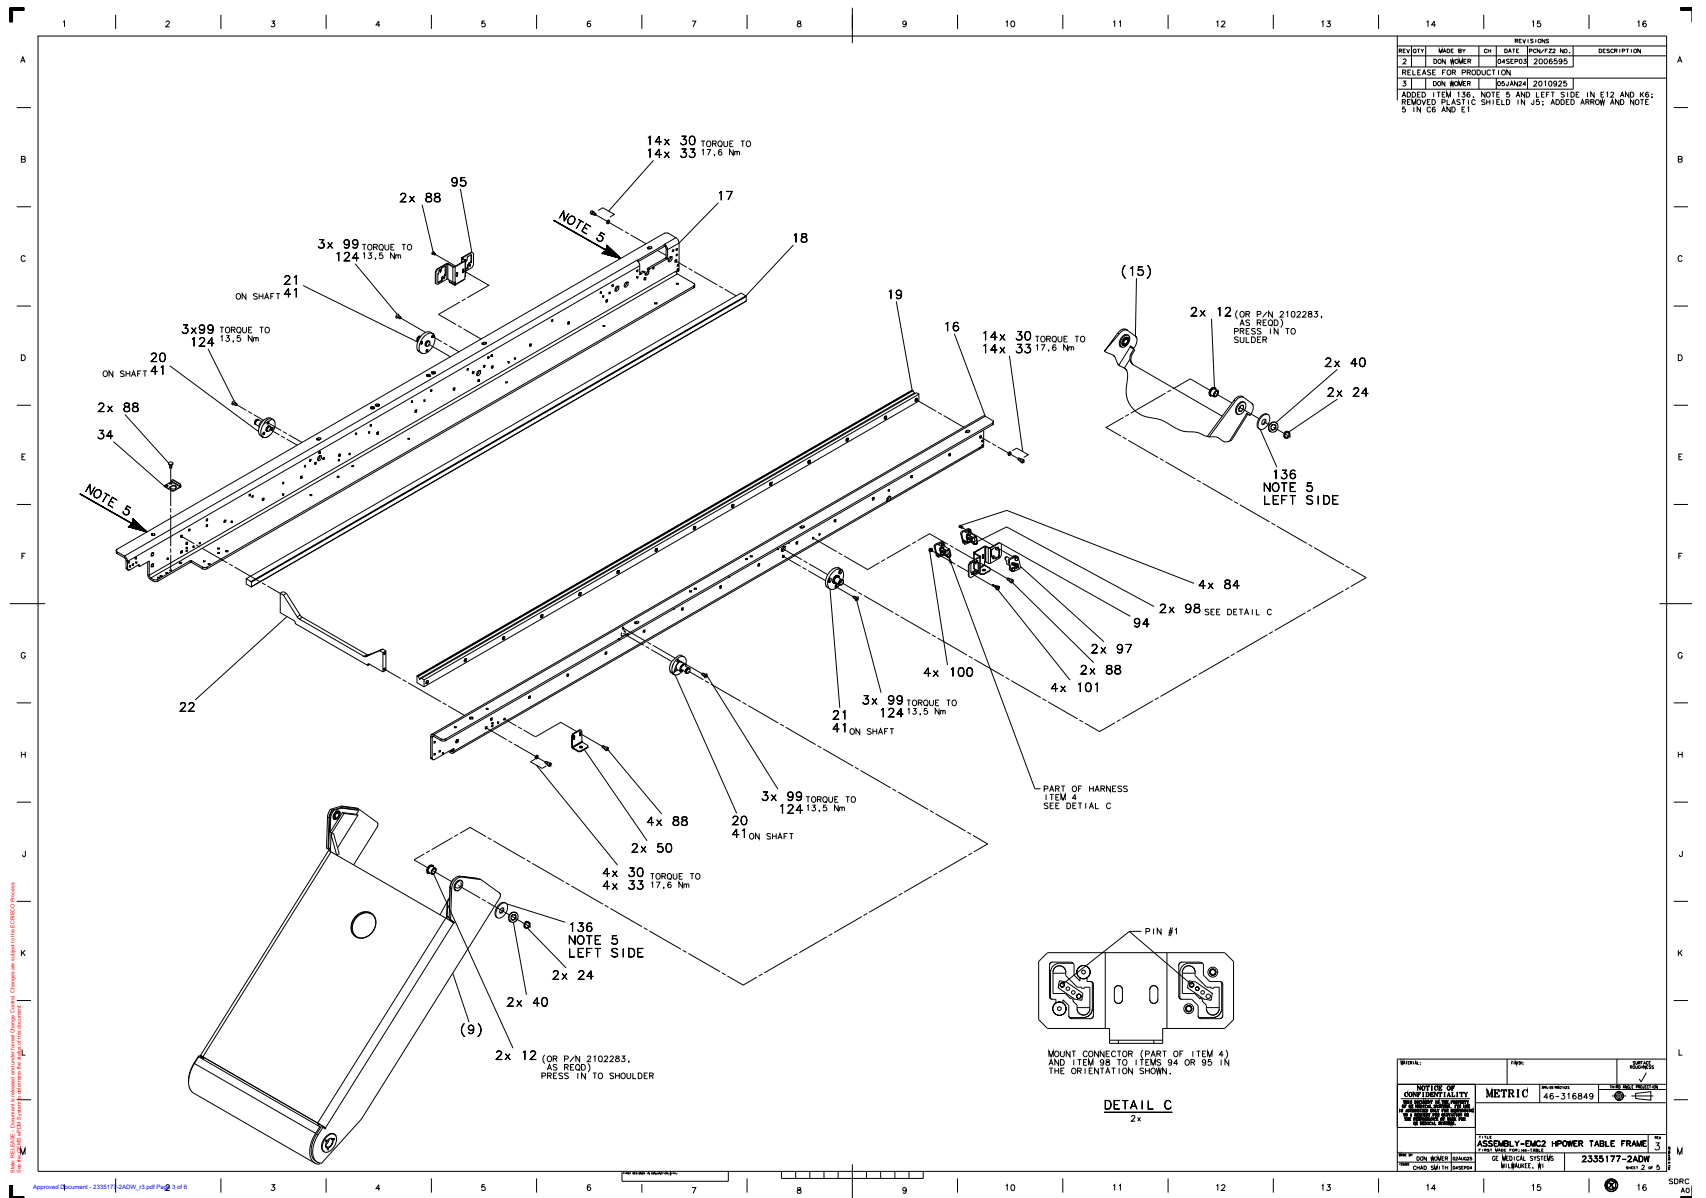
Table Frame Assembly (2335177-2 sheet 2, rev 3)
